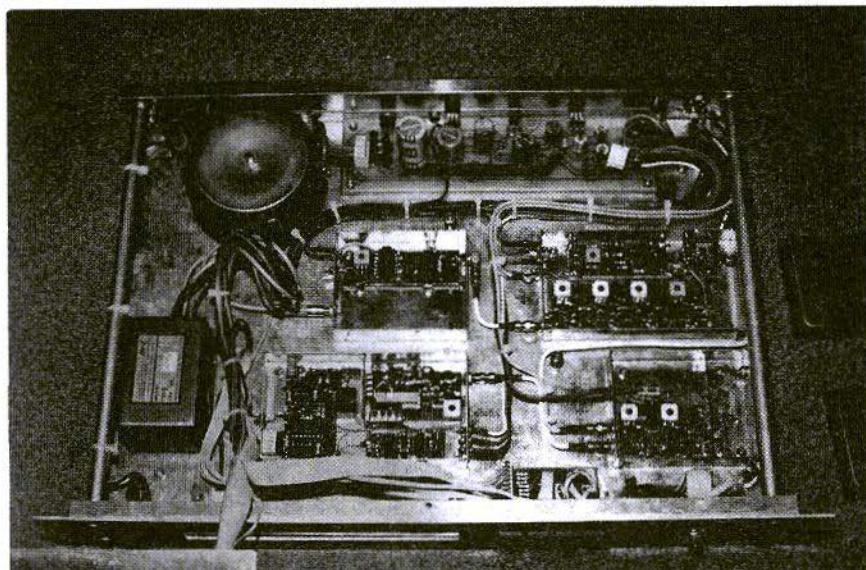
The Lower Assemblies are mounted in tin-plate housings on the base
